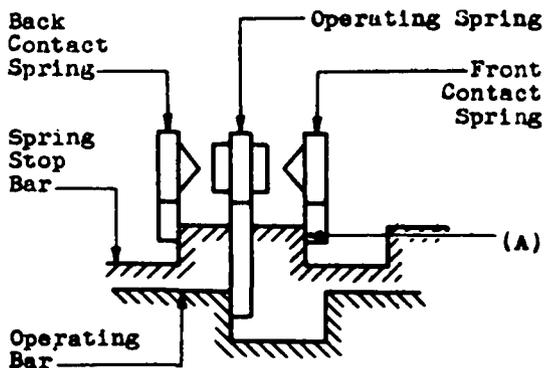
Tang Pressure - Transfer Spring Combination - Front Contact Spring
